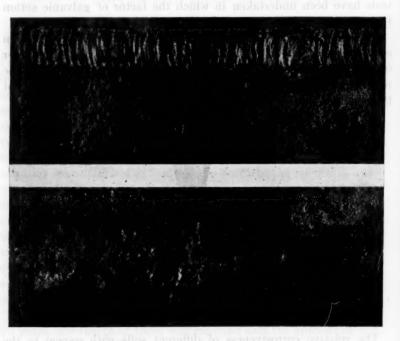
CORROSION OF PIPE WITH A BRONZE WELD
